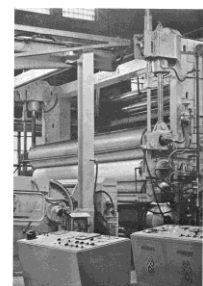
Four-Roll Machine Calendar with two 6-Rolls as bottom and top roll
